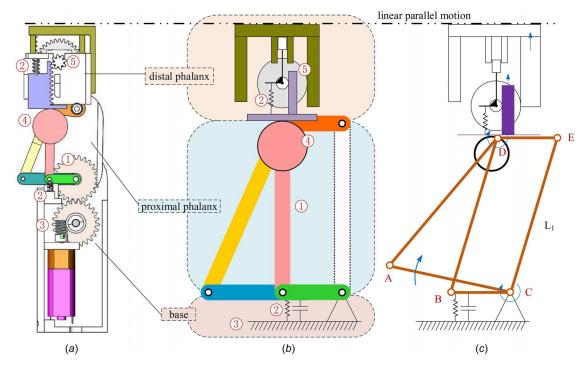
(a) Drawing of finger design made by CAD software and (b) colored diagram of the linkage mechanism, labeled by components: (1) linkage mechanism, (2) spring and mechanical limit, (3) base, (4) cam and follower, and (5) concentric gears and gear racks. (c) finger schematic during parallel pinching, with the linkage elements labeled.
